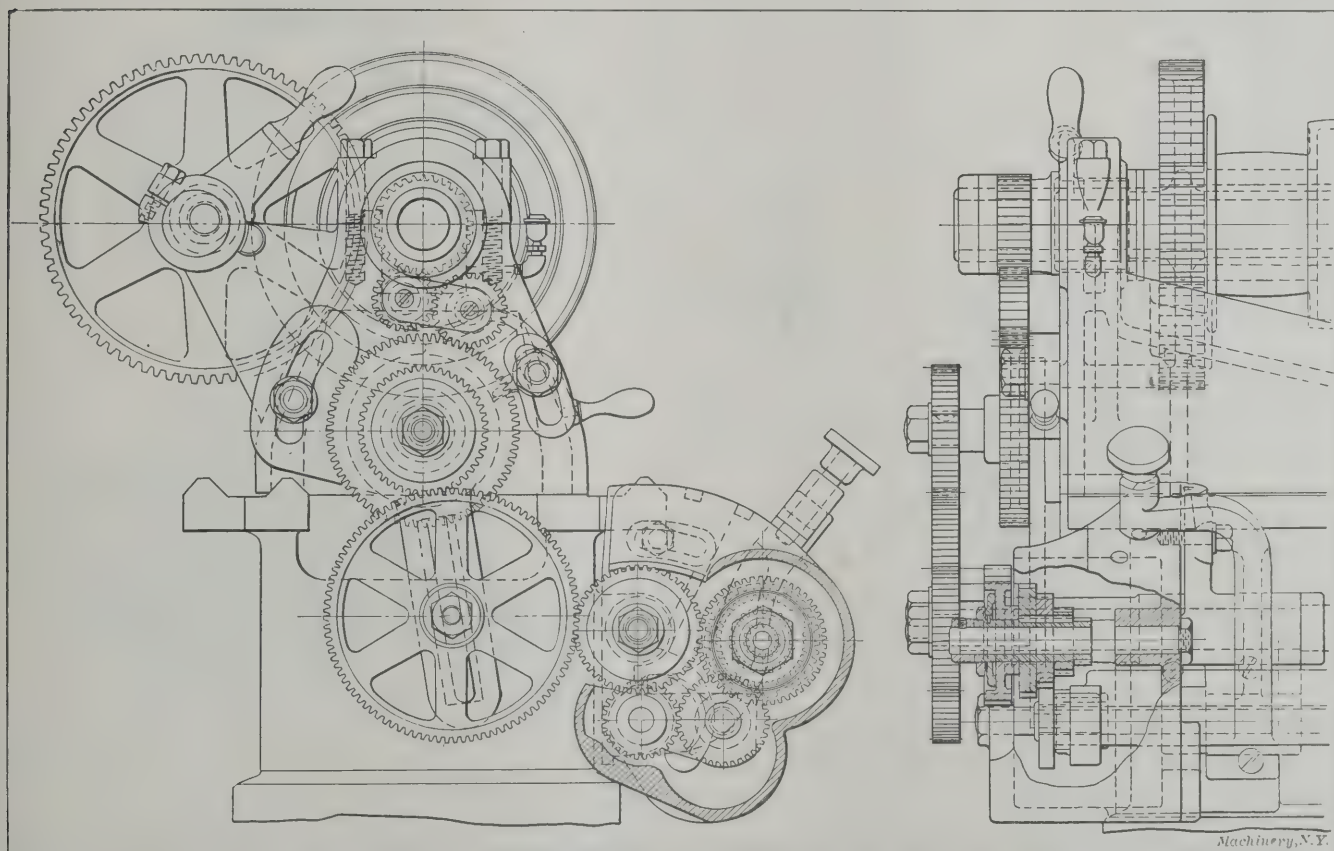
Design of Feed Box and Gearing, Milwaukee Machine Tool Co.'s 16-inch Lathe
